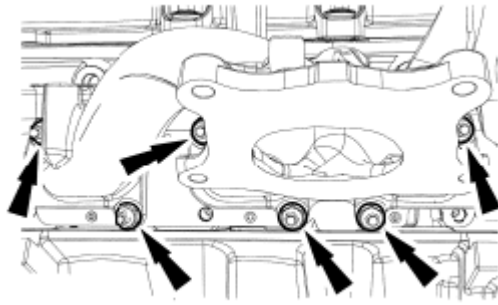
Locating RH Exhaust Manifold Heat Shield Bolts
